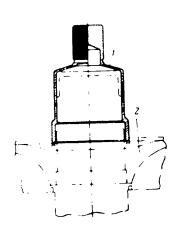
A Chuck for Forcing the Fan Impeller Onto the Shaft
